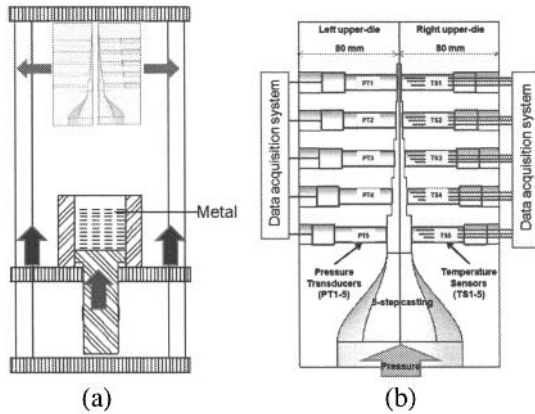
Schematic diagram of (a) squeeze casting machine and (b) upper-die configuration.
